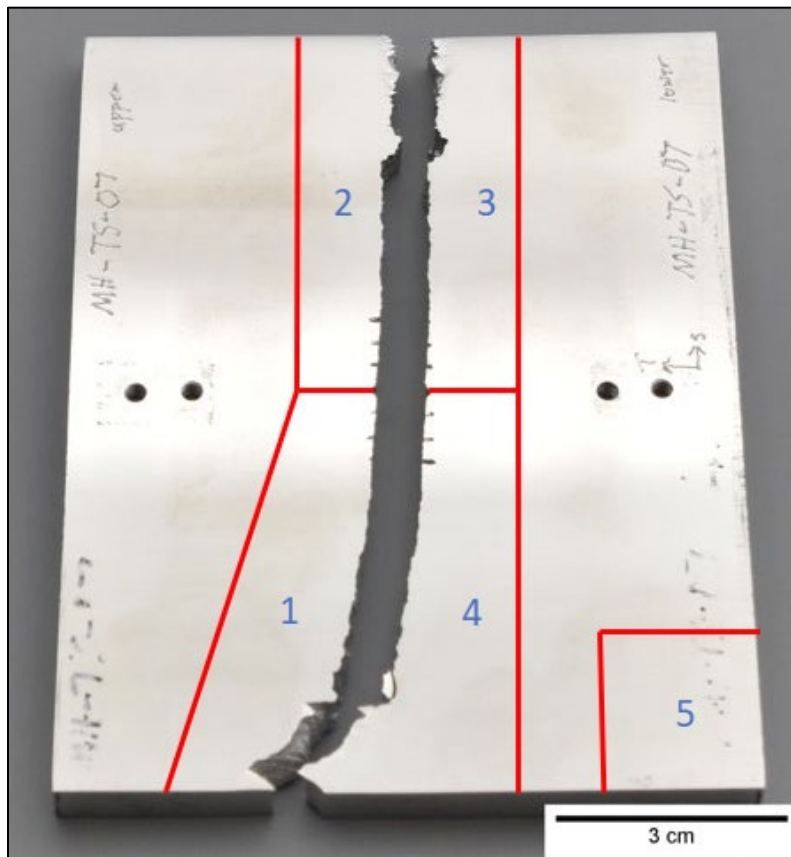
Machining instructions for EDM sectioning of center-cracked panel MH-TS-07. Sectioning will result in four fracture edge specimens (numbered 1-4) and one base microstructure specimen (number 5) for each plate.
